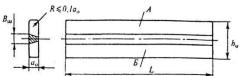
Specimen with longitudinal weld for static bend testing of metal of
